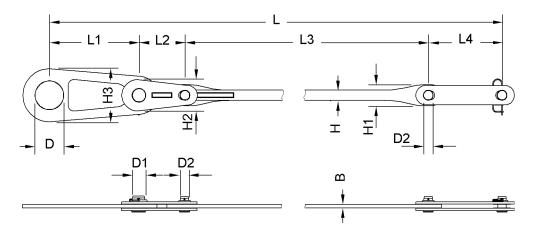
Dimensions of jib pendant strap on 1713 jib head section
